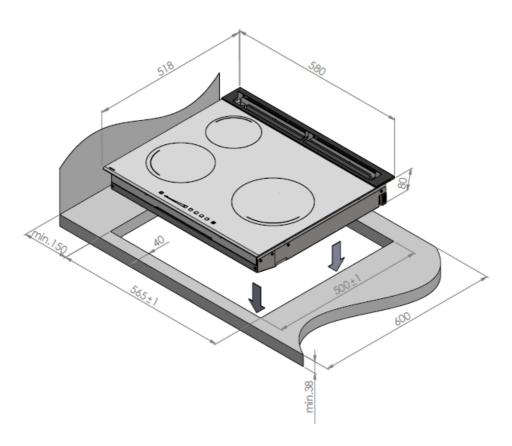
Dimensions and method of mounting the GPC 3+1 cooker
